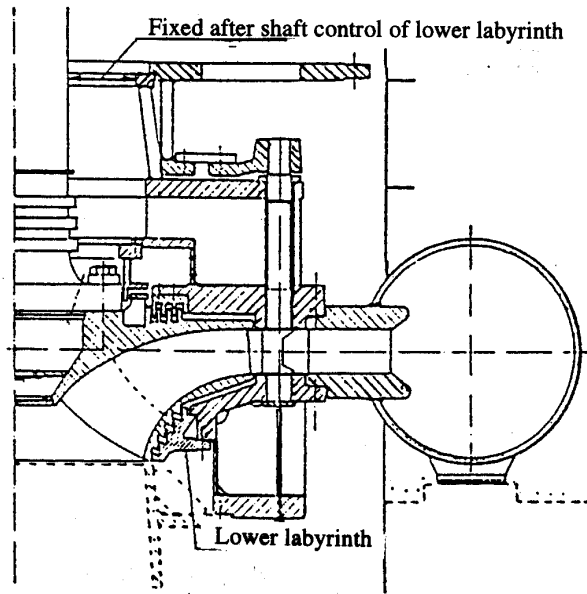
Turbine shaft is connected to generator flange for control of turbine generator shaft straightness by rotating the shaft fixed in position by wedges in the lower labyrinth seal. The fixed straight shaft is used for positioning the radial bearing and the labyrinth shaft seal (see description in the text).
